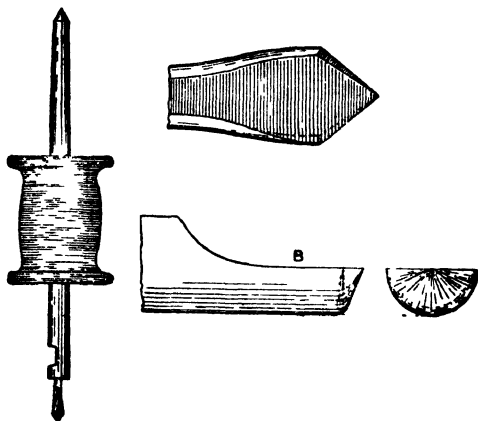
Drill Stick and Drills for Cutlery Repairing.
